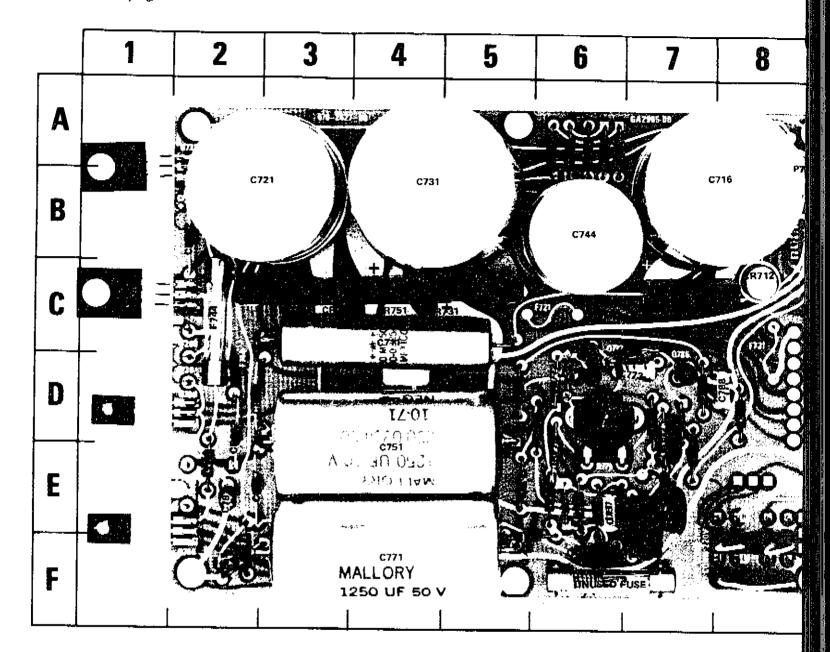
A3 Regulator circuit board below SN 8050000.
